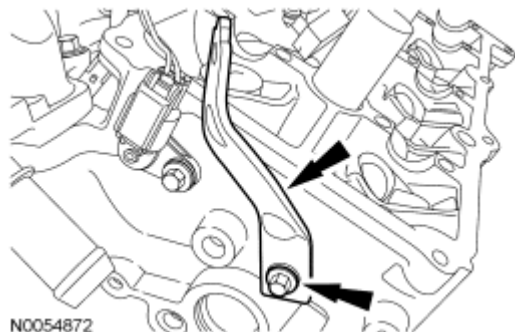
Locating Upper Intake Manifold Bracket & Bolt
